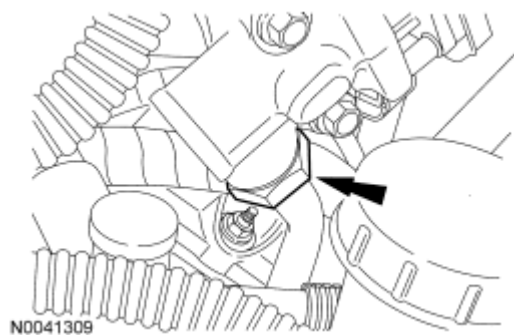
Locating Upper Torque Converter Housing Bolts
